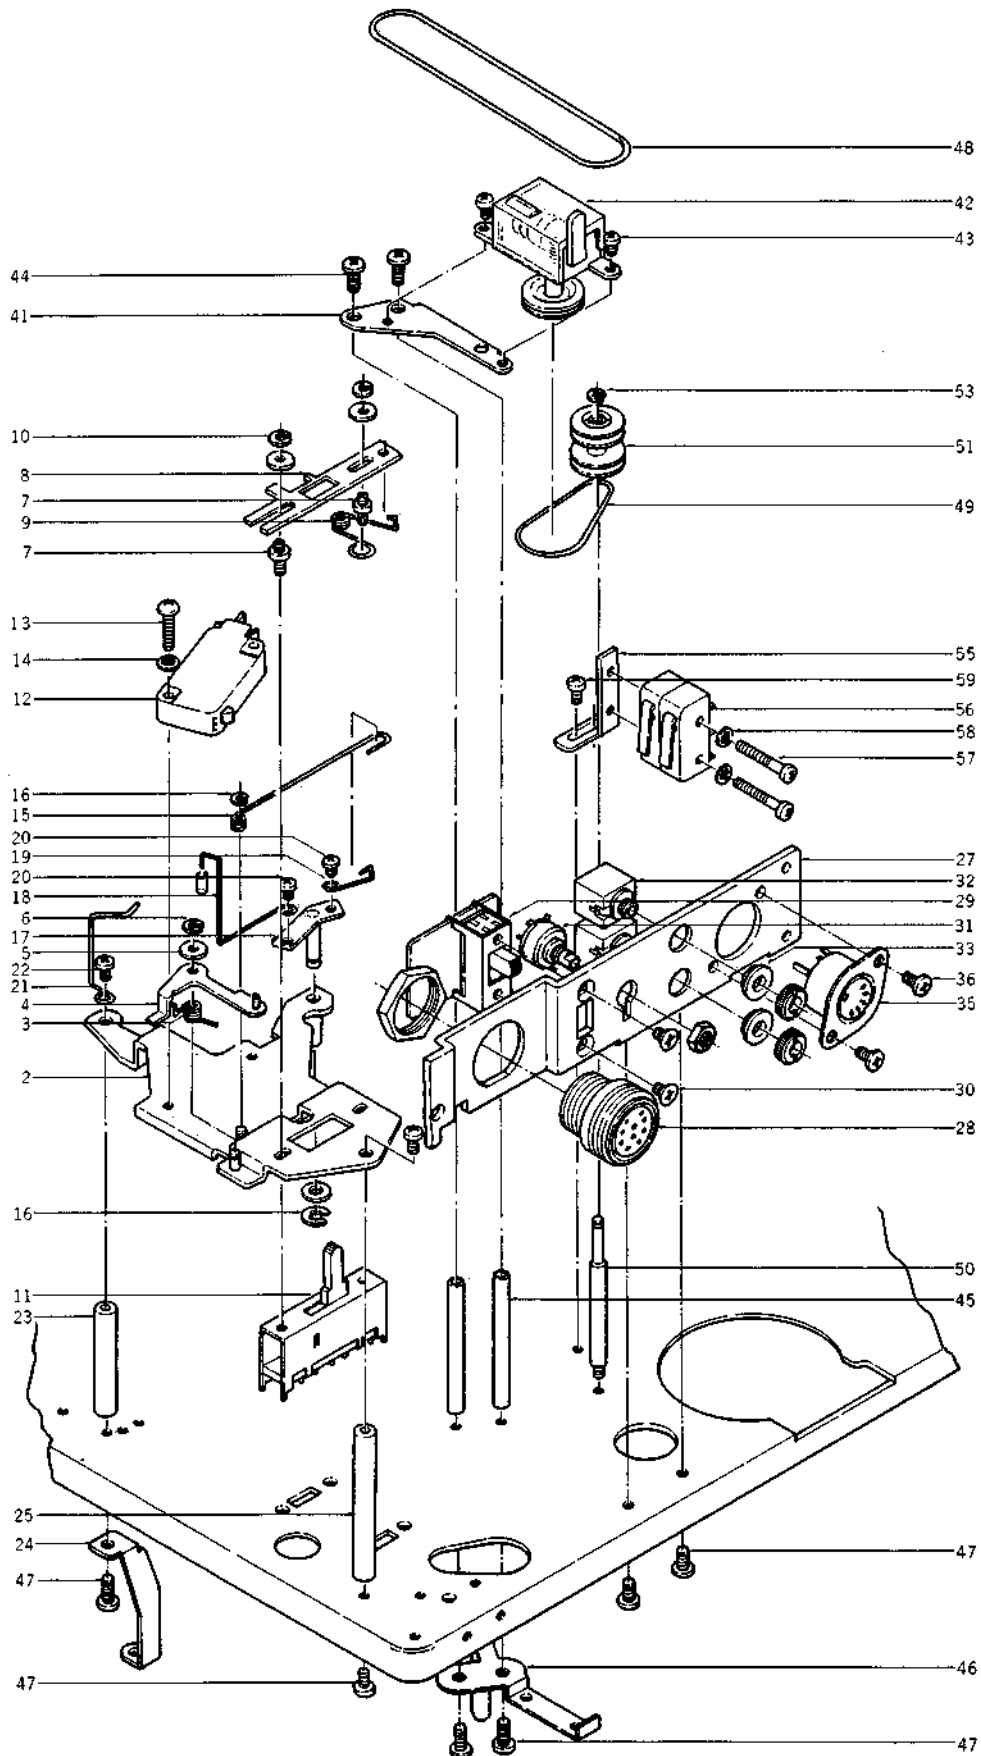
ILLUSTRATION OF ASSEMBLY BLOCK
